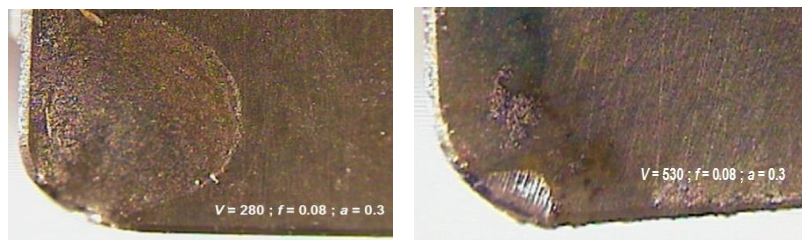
Morphology of crater wear in the cutting tool CC650 (for two cutting speed: 280 m/min and 530 m/min).
